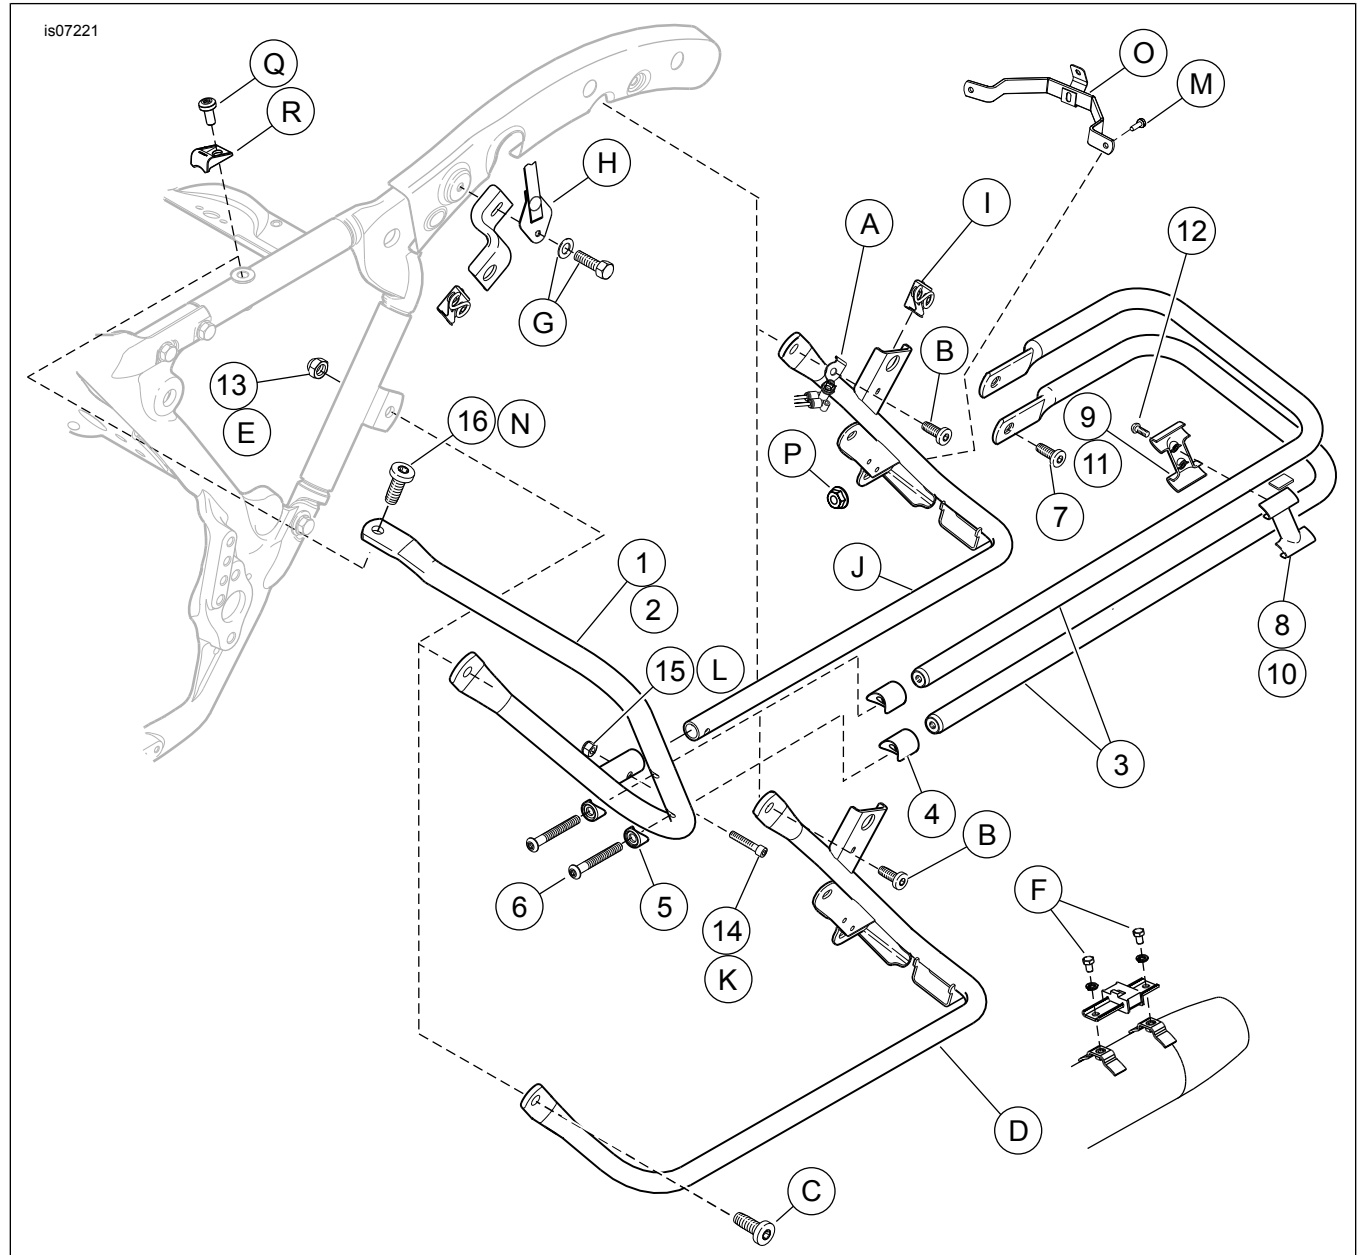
Service Parts: Saddlebag Guard Kit (Left Side Shown)
